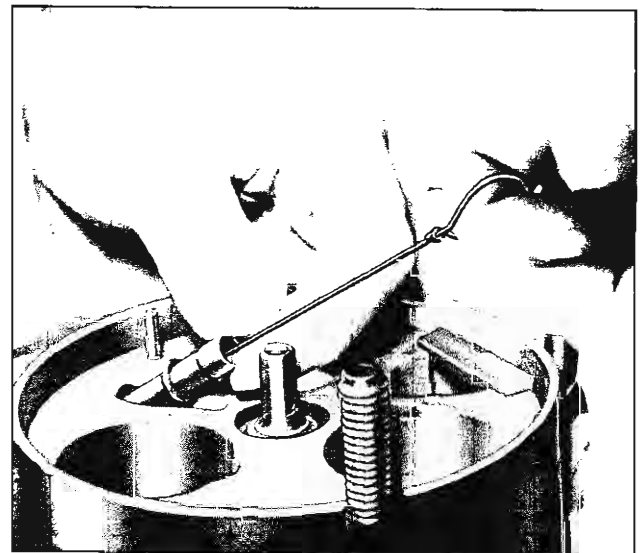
Removing Oil Inlet Tube and "O" Ring
